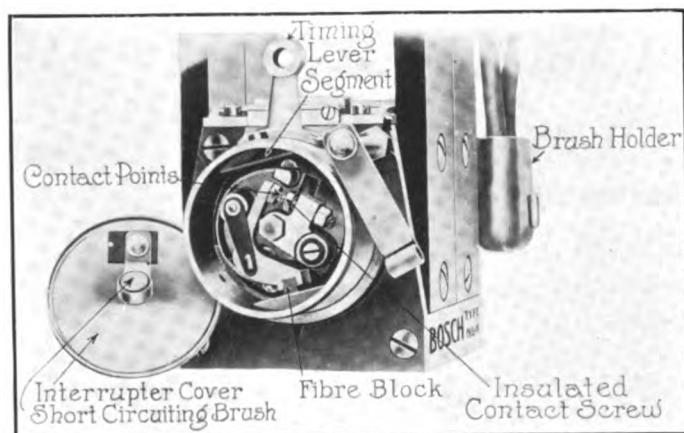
The Circuit Breaker Mechanism of the Type NU4 is the Same as in Standard Bosch Types.
